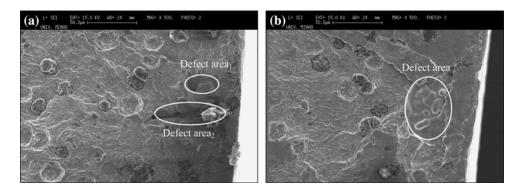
(a) Fracture surface of sample 4 (defect area₁ = 543 μ m²; defect area₂ = 1.300 μ m²); (b) fracture surface sample of sample 6 (defect area = 2.684 μ m²)
